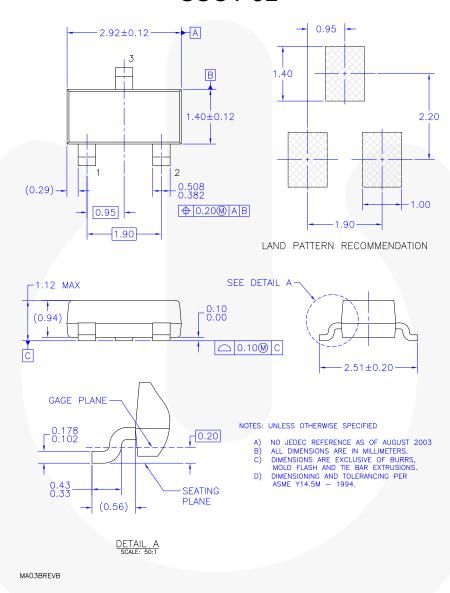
MOLDED PACKAGE, SUPERSOT, 3-LEAD (ACTIVE)
